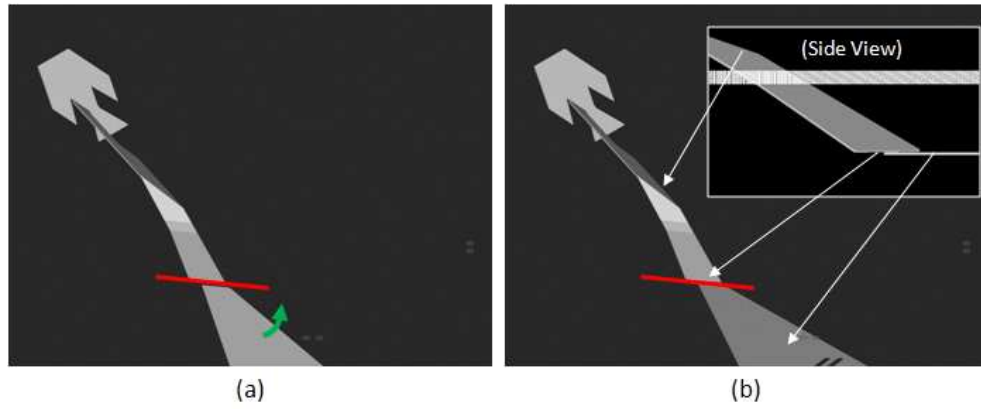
CAD drawing of overhead arm (a) before and (b) after fourth rotation bringing bottom plate parallel with the substrate. All members except the base plate are fixed and only the base plate is rotated about axis 1.
